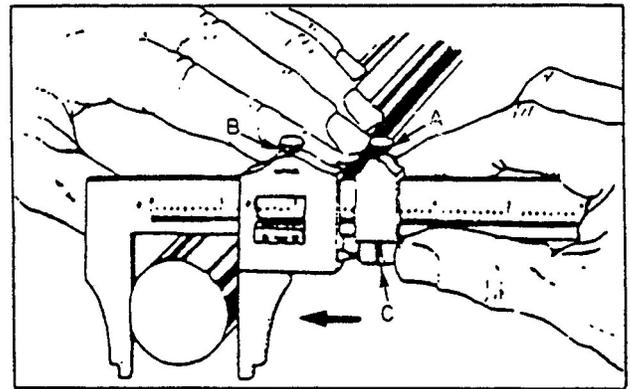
Taking an outside measurement with a vernier caliper.
